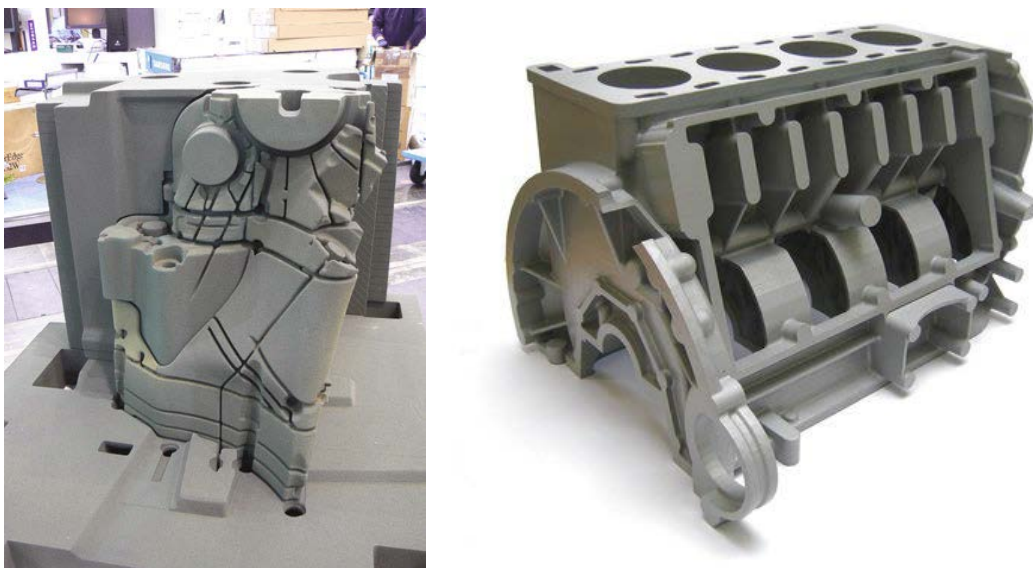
3D printed silica sand mold for casting an aluminum Formula-1 transmission housing (a) 3D printed plastic pattern for investment casting(b) (Contract Manufacturing Services 2016).
